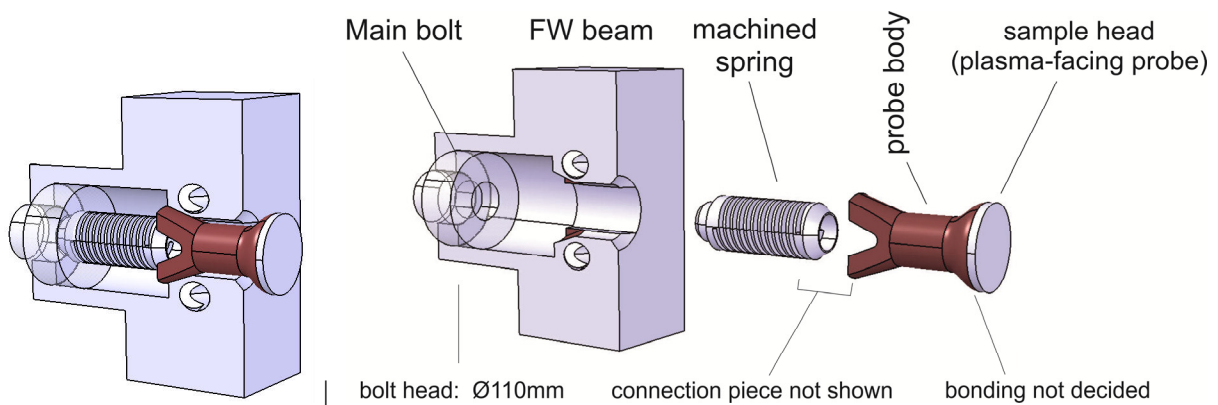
Removable probe in position and exploded view of the assembly in front of the mounting hole
